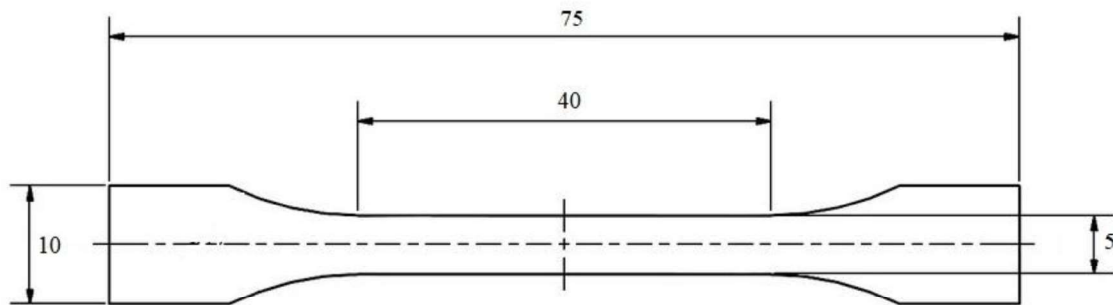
"Dog bones" used for tensile tests (dimensions in mm)
